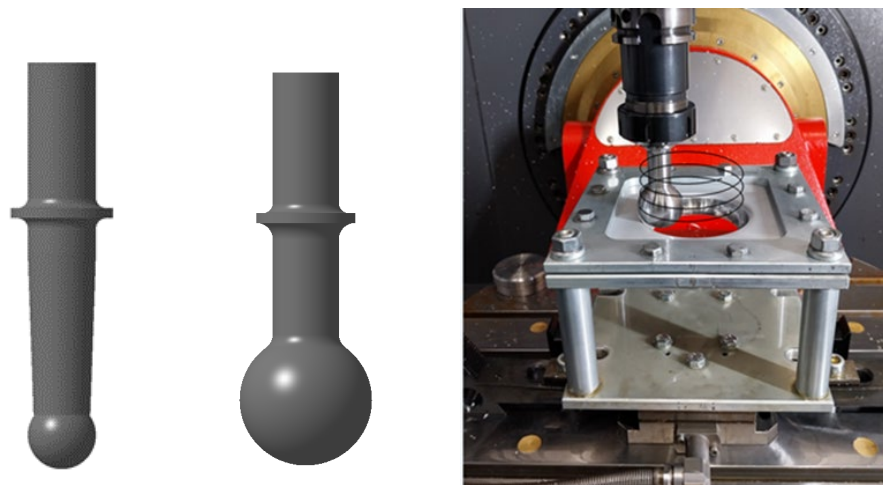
Schema of hemispherical tools and setup used in the hole flanging experiments by SPIF.
